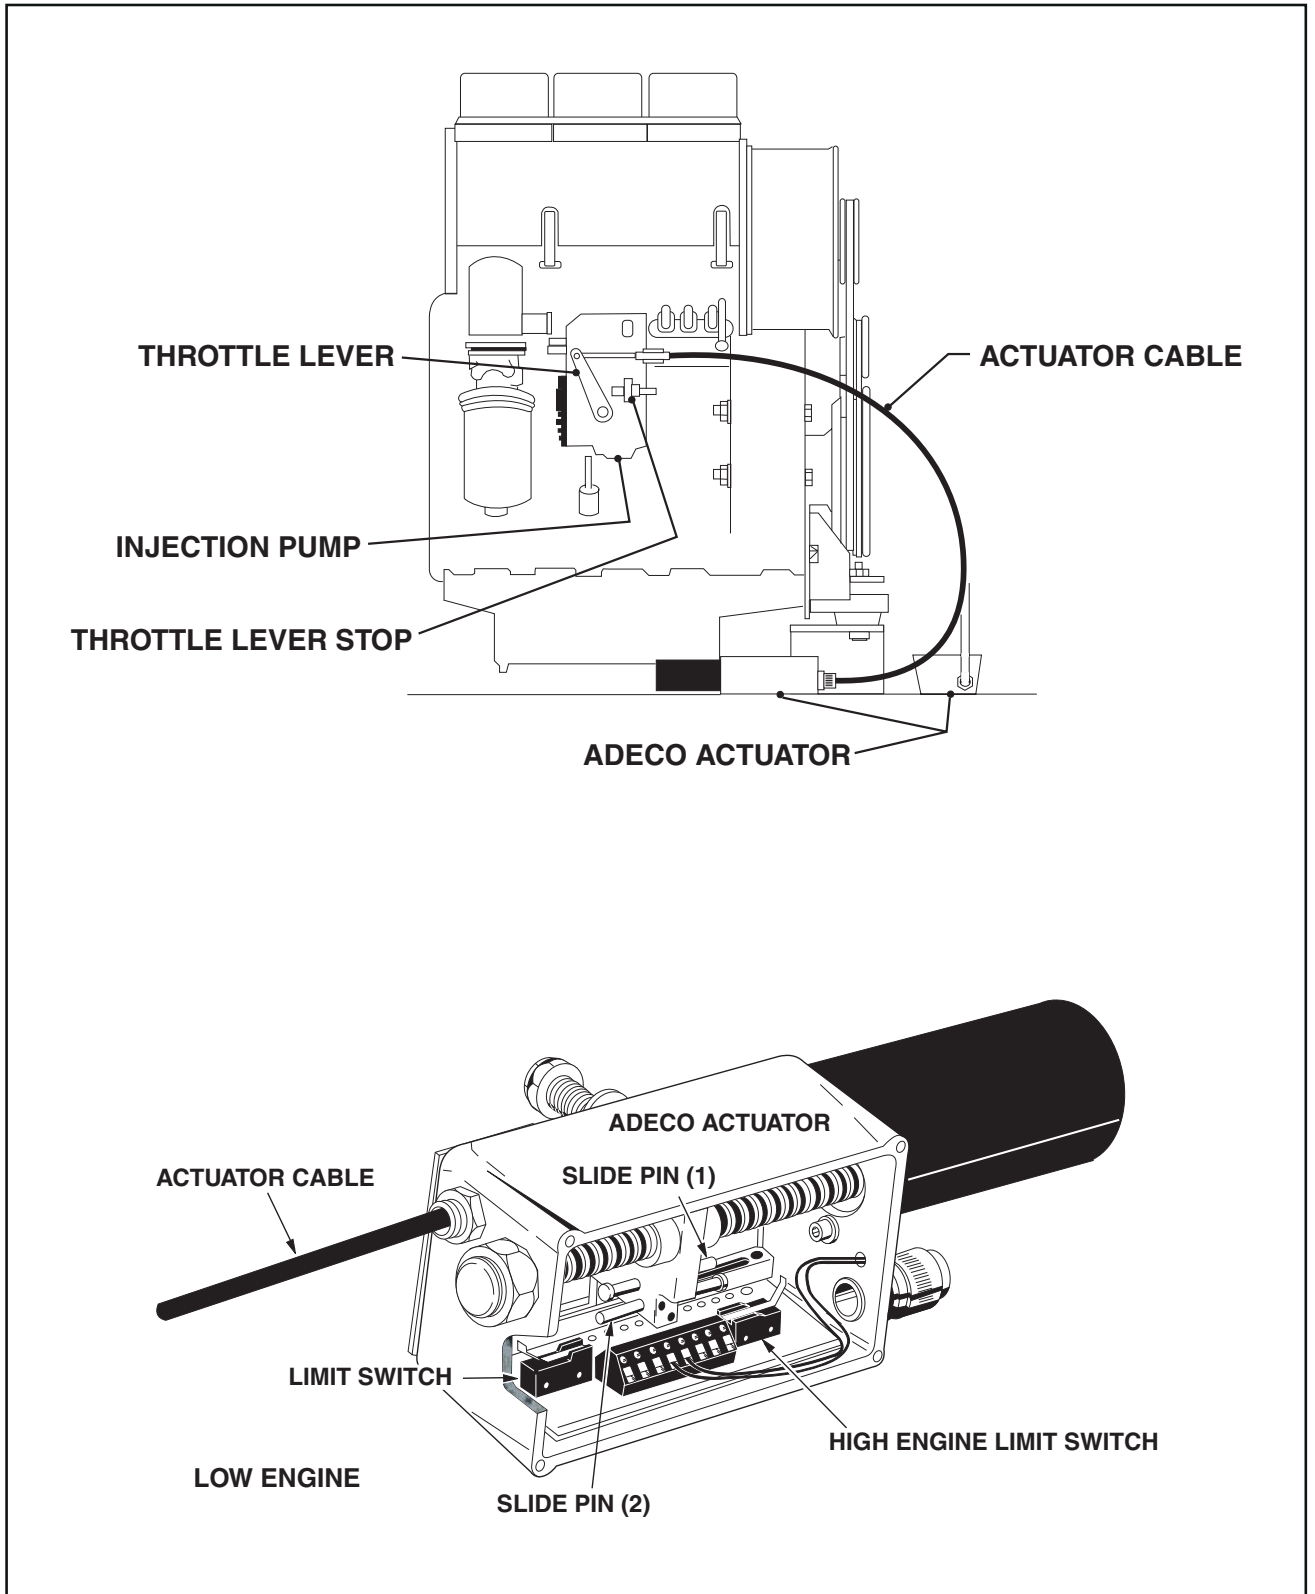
Throttle Checks and Adjustments - Deutz Engine
